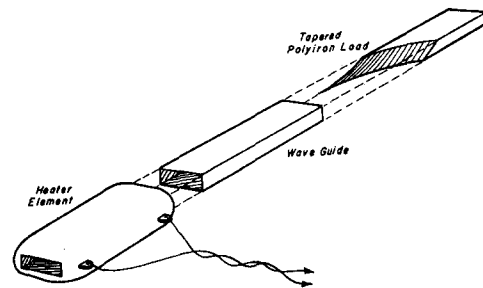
Exploded view of calibrating load (thermometer not shown).
